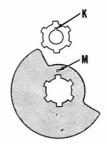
Mark (M) on rotary valves should be aligned with keyway (K) on the drive collars.
